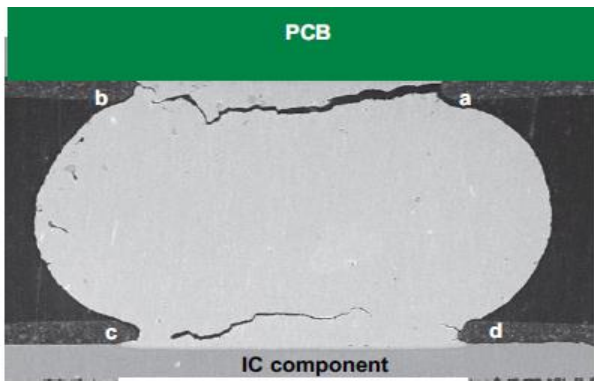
Crack growth in solder joints near PCB [17]
